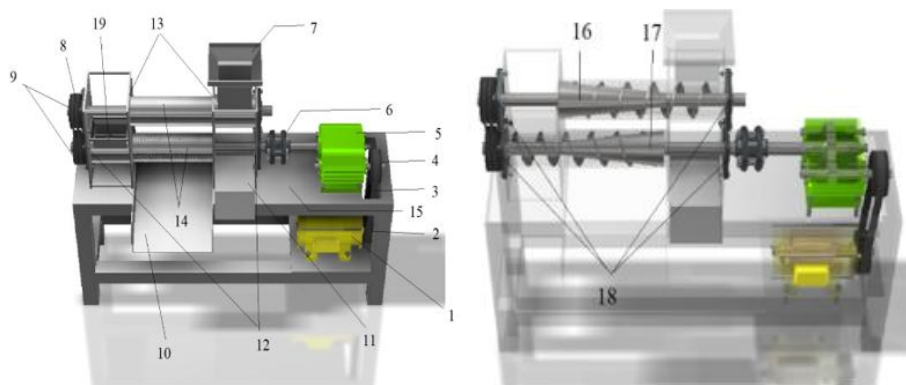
Design of the coconut milk pressing machine with two screw shafts
